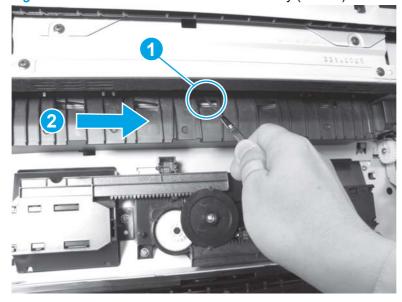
Remove the fuser drive assembly (6 of 10)
